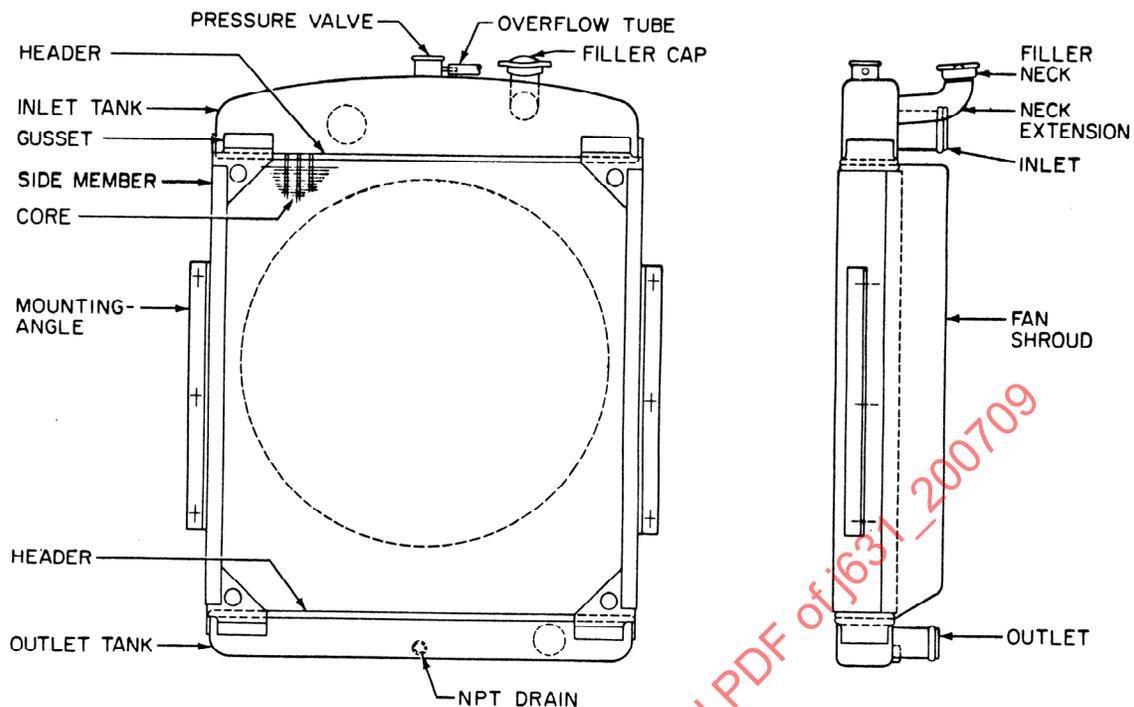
HEAVY-DUTY RADIATOR, SHEET METAL TYPE FILLER FRAME
